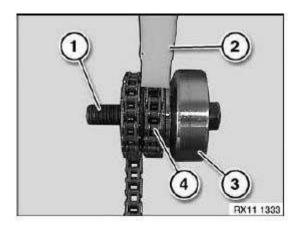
Sprocket Wheels, Guide Rail And Hub Courtesy of BMW OF NORTH AMERICA, INC.
